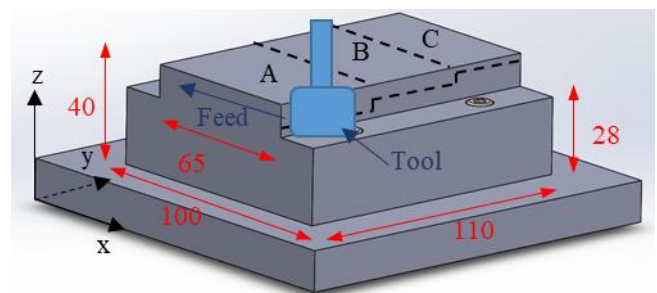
Scheme of the face milling tests and dimensions of the specimen. Dimensions in mm.
